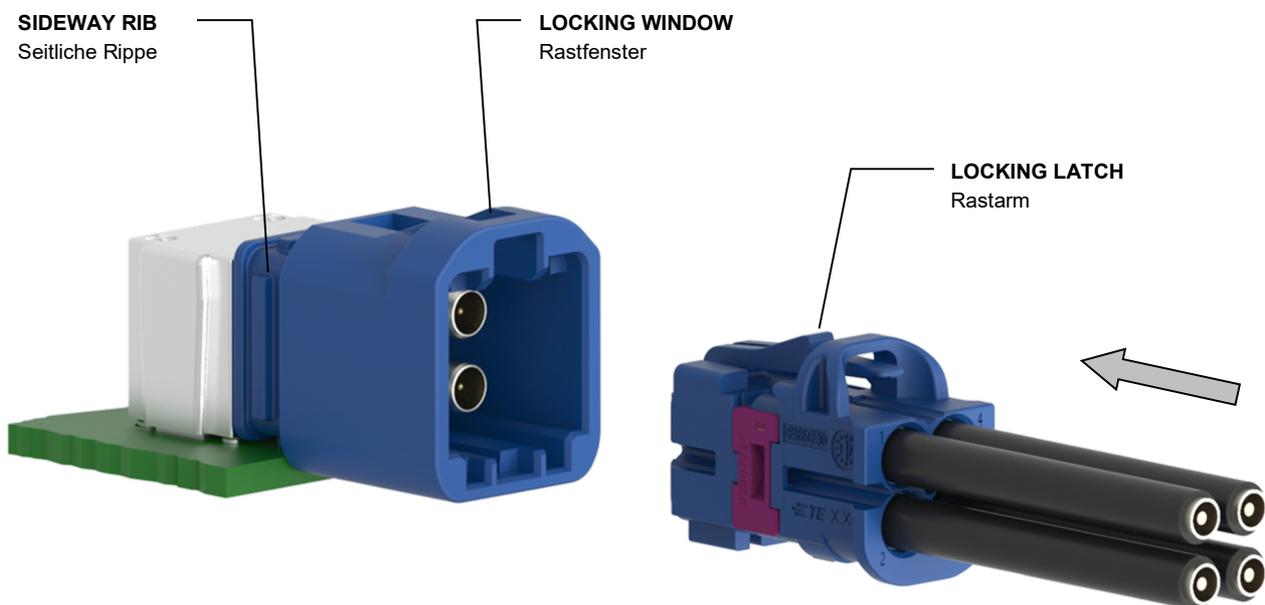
Assembly with cable connector / Montage mit Kabelbaumsteckverbinder
